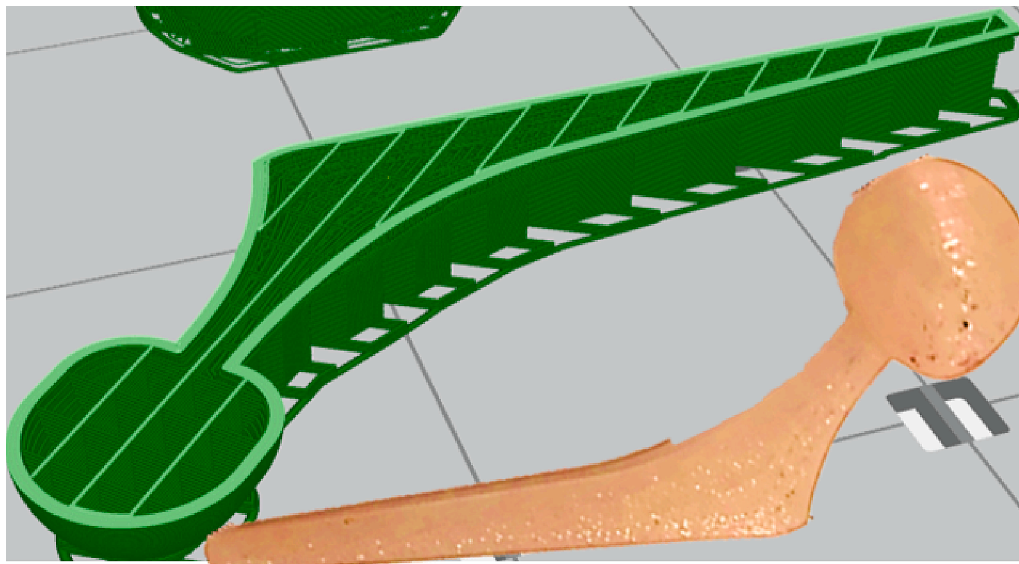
Slicing of hip implant design for 3D printing and printed hip implant.
